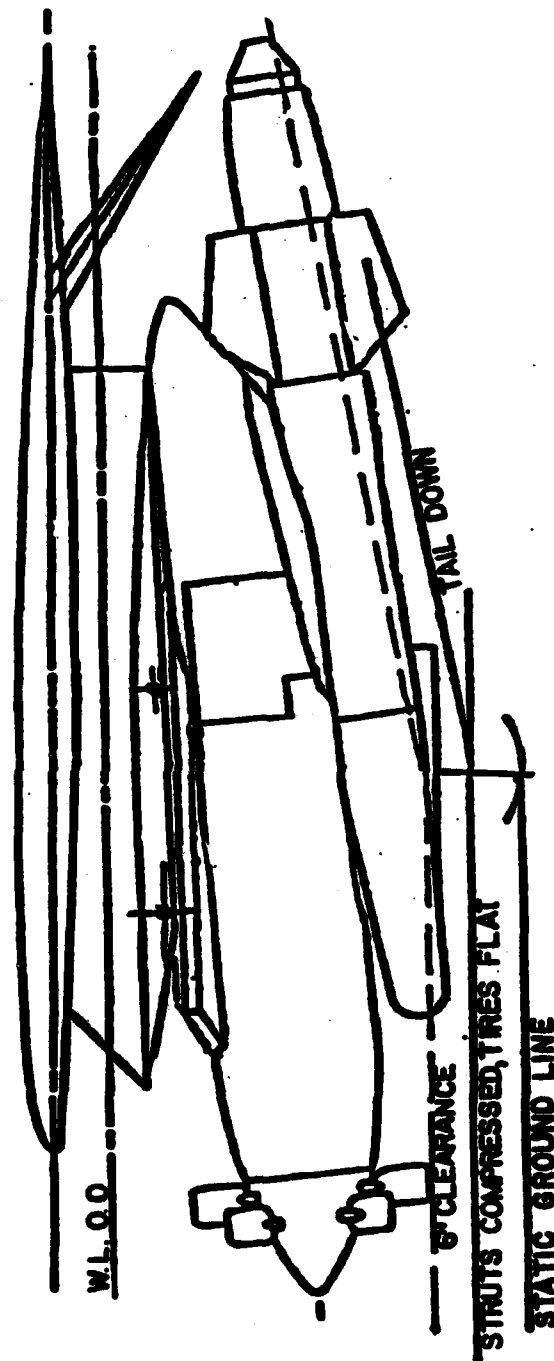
QF-4 NSTTS INSTALLATION, SIDE VIEW
